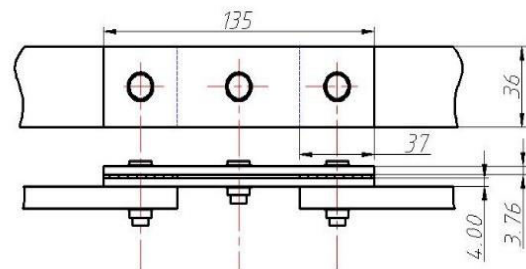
Dimensions in mm for the open-hole composite-aluminum bolted joint compressive model without any shim material.
